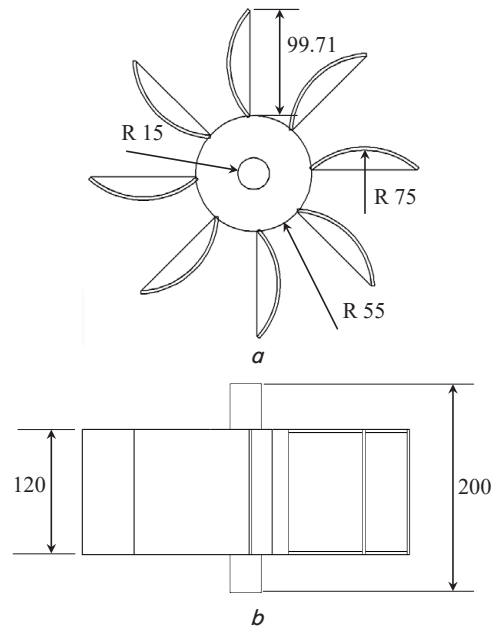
Bowl bladed kinetic turbine dimension: a – Top view; b – Side View
